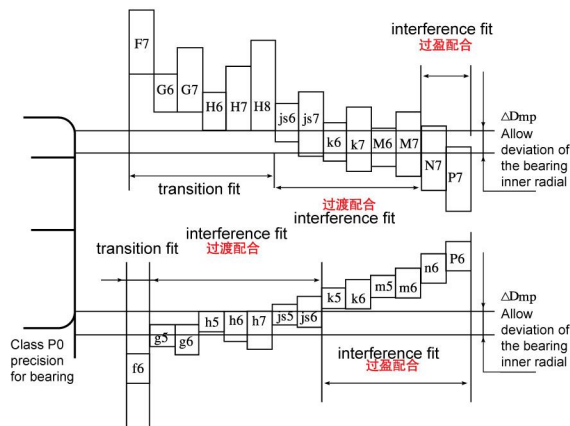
Shaft and shell fit relation of size tolerances (Class P0 precision for bearing)
